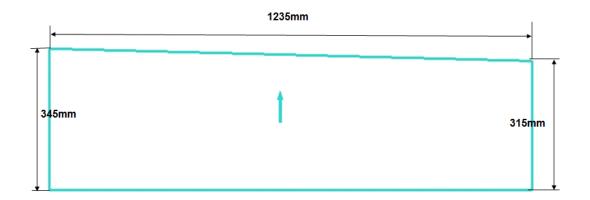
Flat blank geometry for actual part's stamping process with 1mm thickness.
